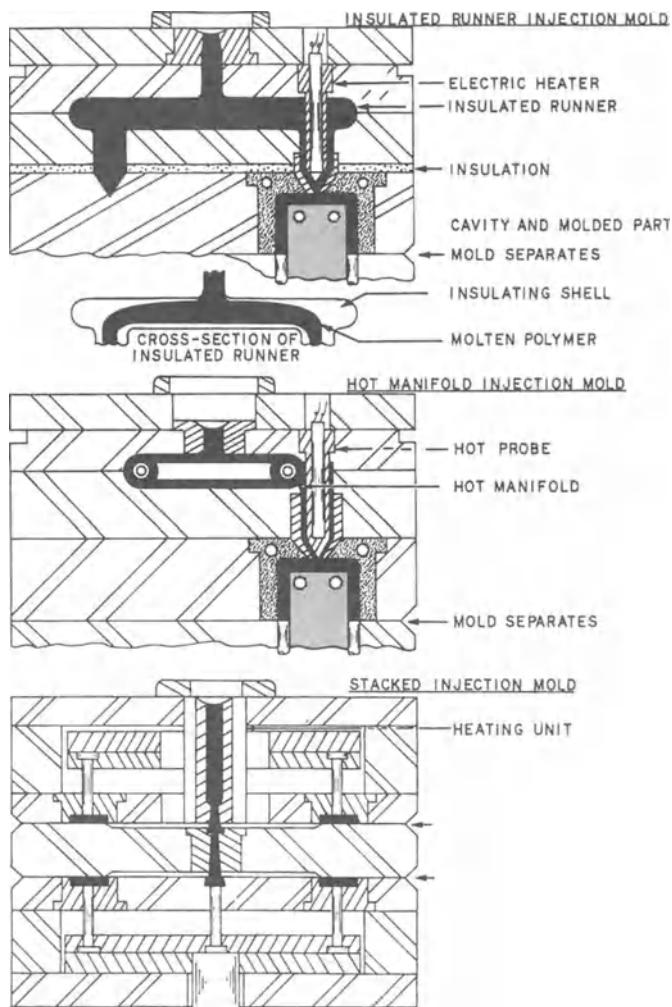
An insulated-runner, a hot-manifold, and a stacked mold.
